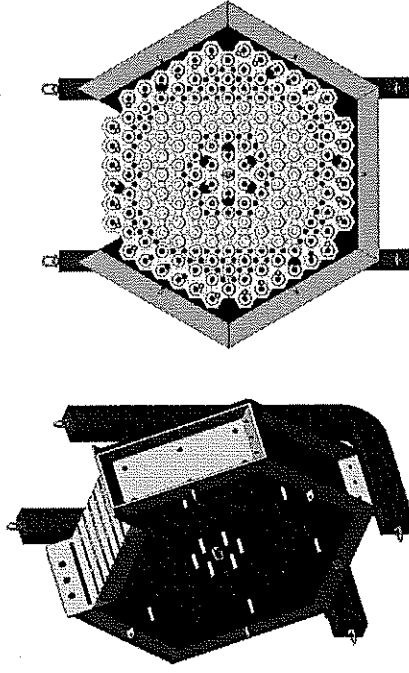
RENDER OF THE CORE MOLD SHOWN IN THE "415105 LOWER PLENUM ROOF" CONFIGURATION: FULL ASSEMBLY (LEFT) AND WITH THE FRONT PLATE, TOP AND CAP REMOVED FOR CLARITY (RIGHT).
